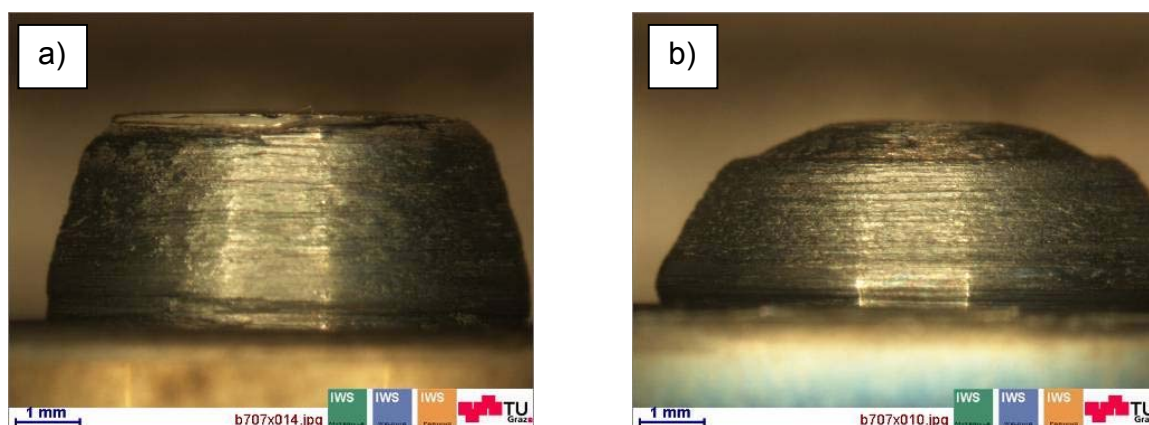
Comparison of tool probe for substrate GB30 a) and BB40 b) after welding
